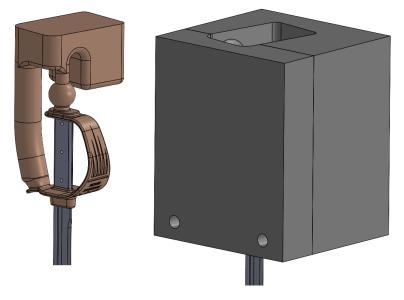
Hilt Over-mold - The holes in the mold are for rods to handle the mold when pouring.
